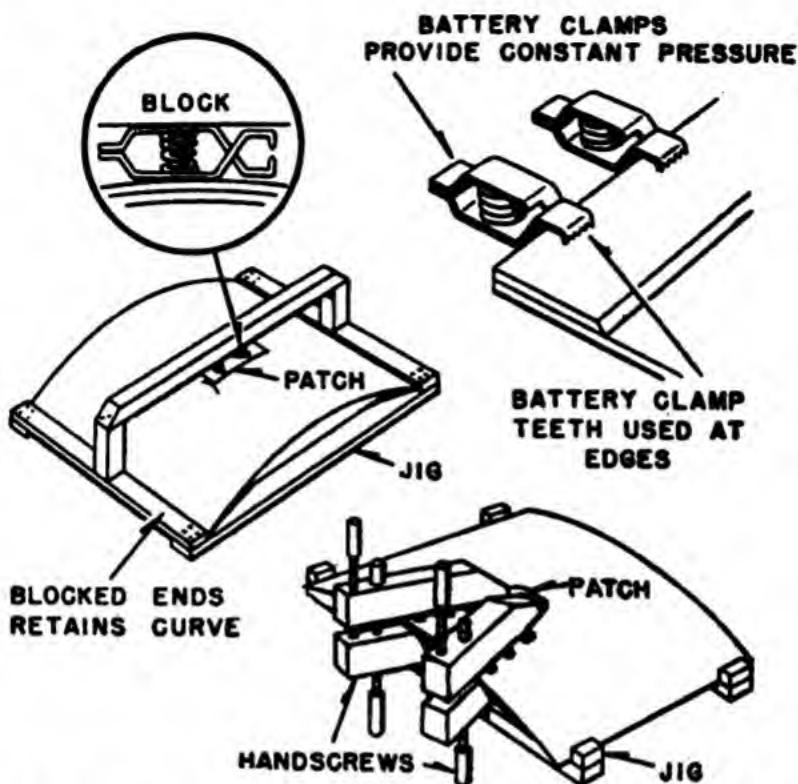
Typical jigs used to hold cemented assemblies together during setting.
